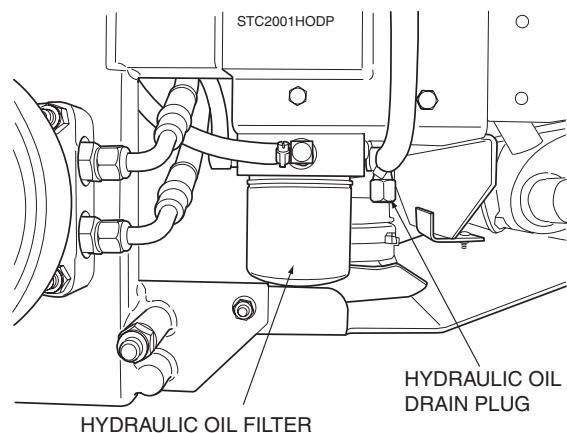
Hydraulic Oil Filter and Drain Plug
